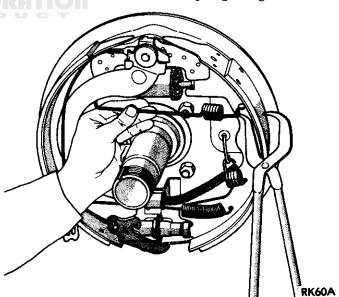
Removing/Installing Shoe-To-Shoe Upper Spring
